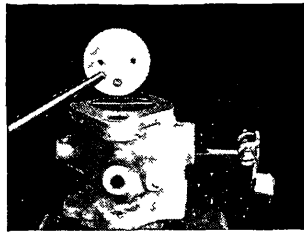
Remove throttle valve screws, valve and throttle shaft and lever. Do not remove baffle plate from casting. Check shaft for wear, loose lever and throttle rod hole in lever for wear
